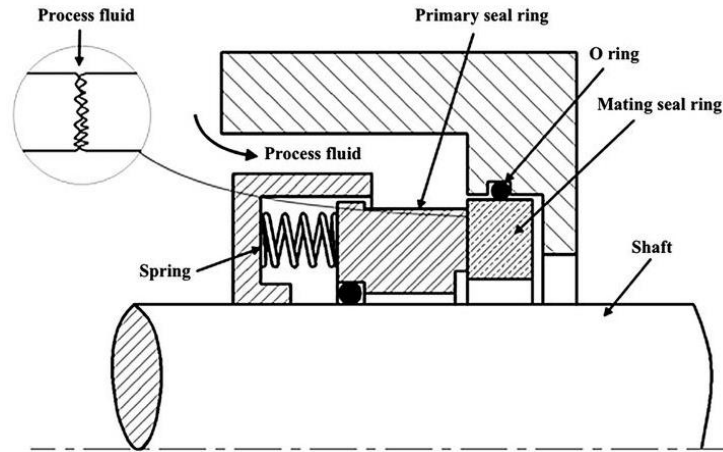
Schematic of a typical Mechanical Face Seal showing the main components [3].
